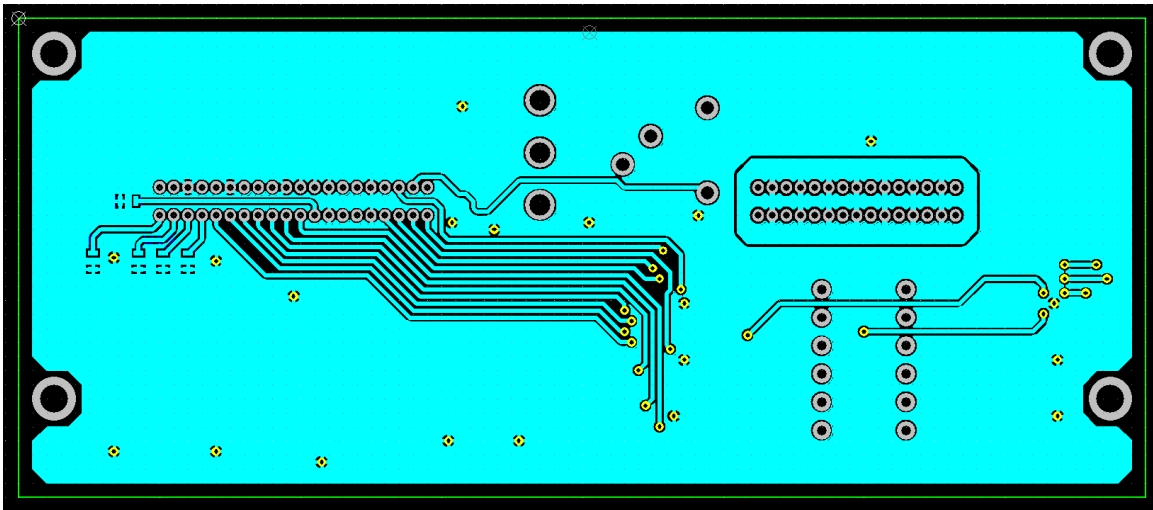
I/O Daughtercard, bottom layer & bottom silk
